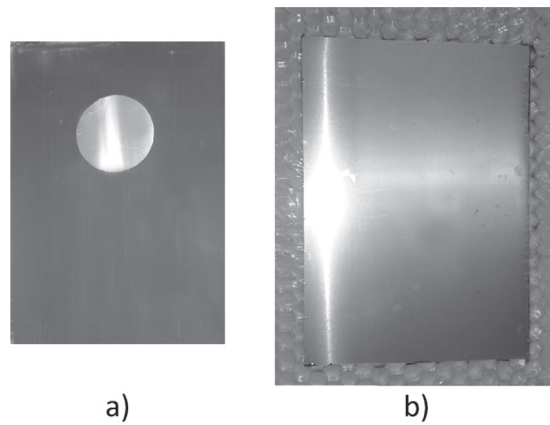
Fabrication of experimental panel: a) layer of epoxy adhesive over skin and b) vacuum bagging of panel.
